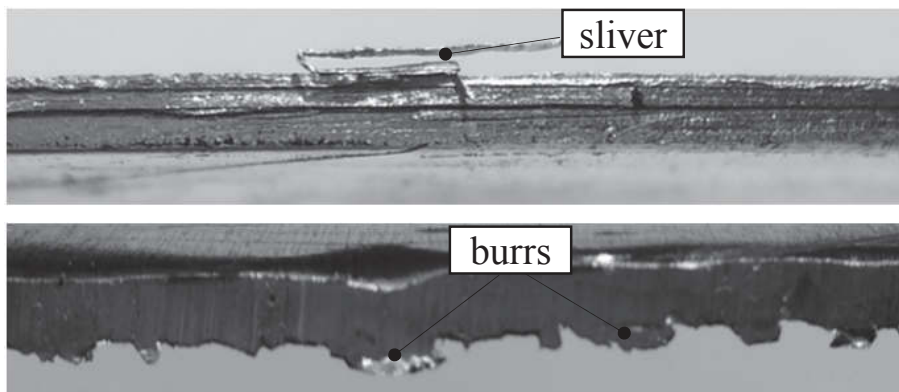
A typical defects of the workpiece's sheared edge
